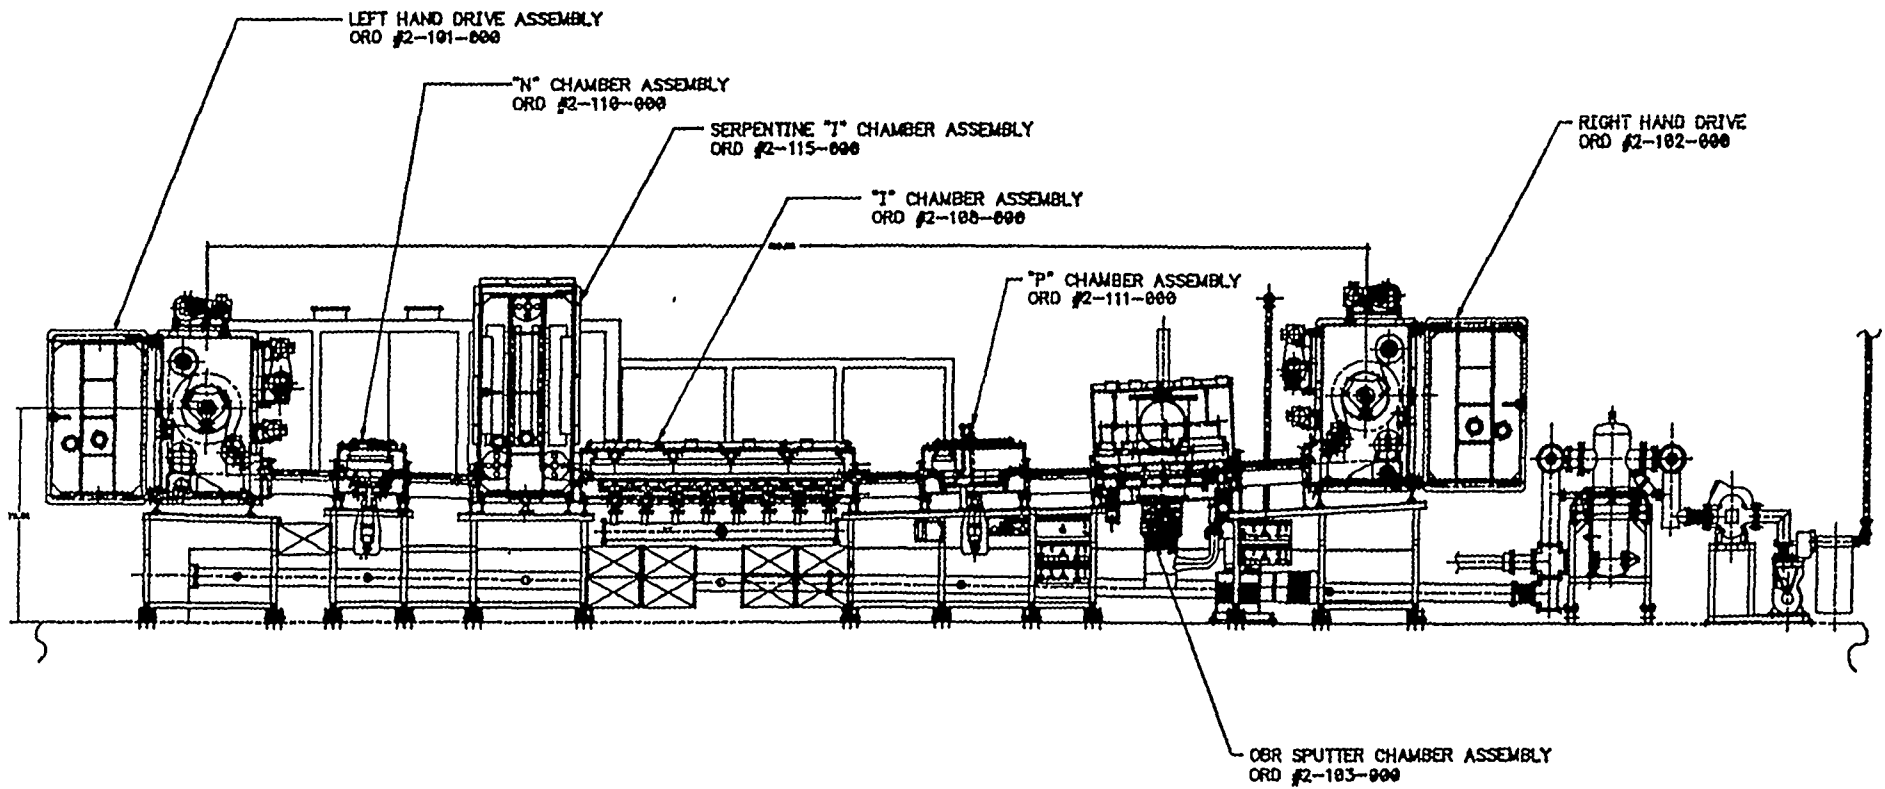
Schematic drawing of ECD's multipurpose continuous roll-to-roll solar cell deposition machine.
